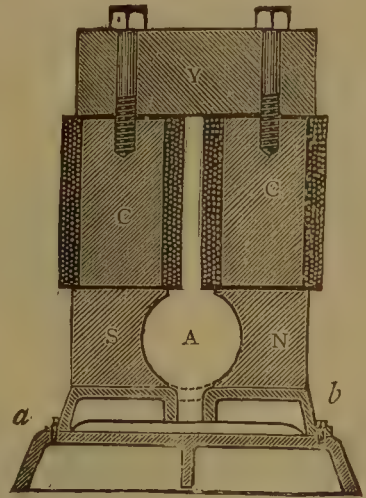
Electro-magnet of a Bipolar Dynamo Machine.
